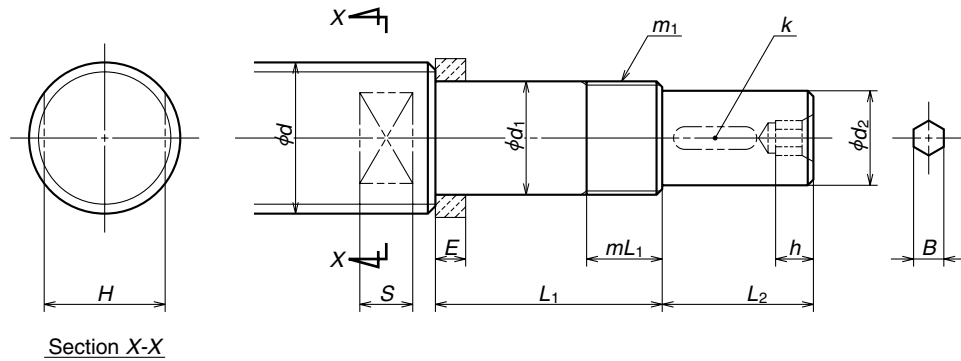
Rolled ball screw shaft end (drive side)
